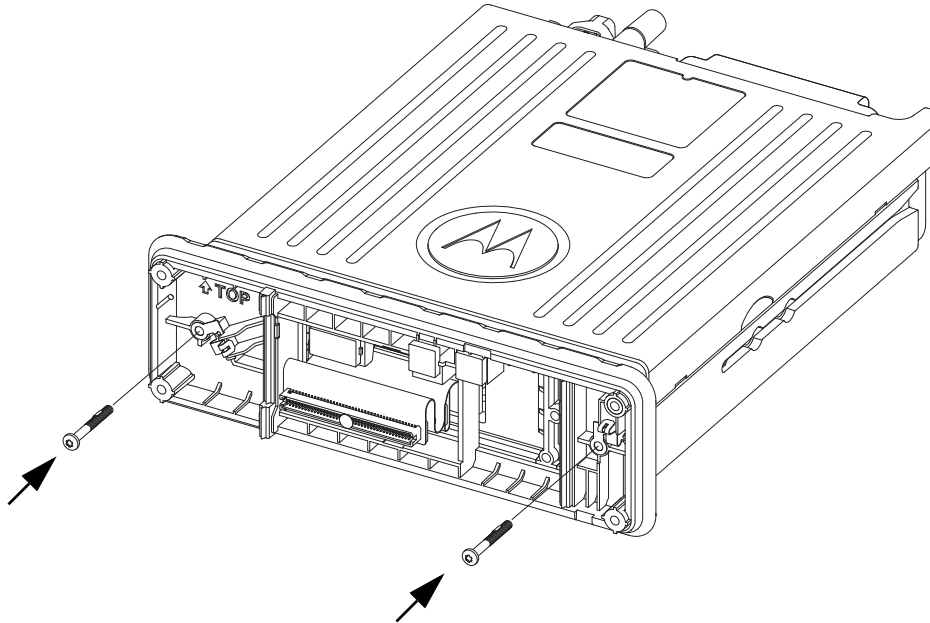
Installing the Back Housing Assembly onto the Transceiver
